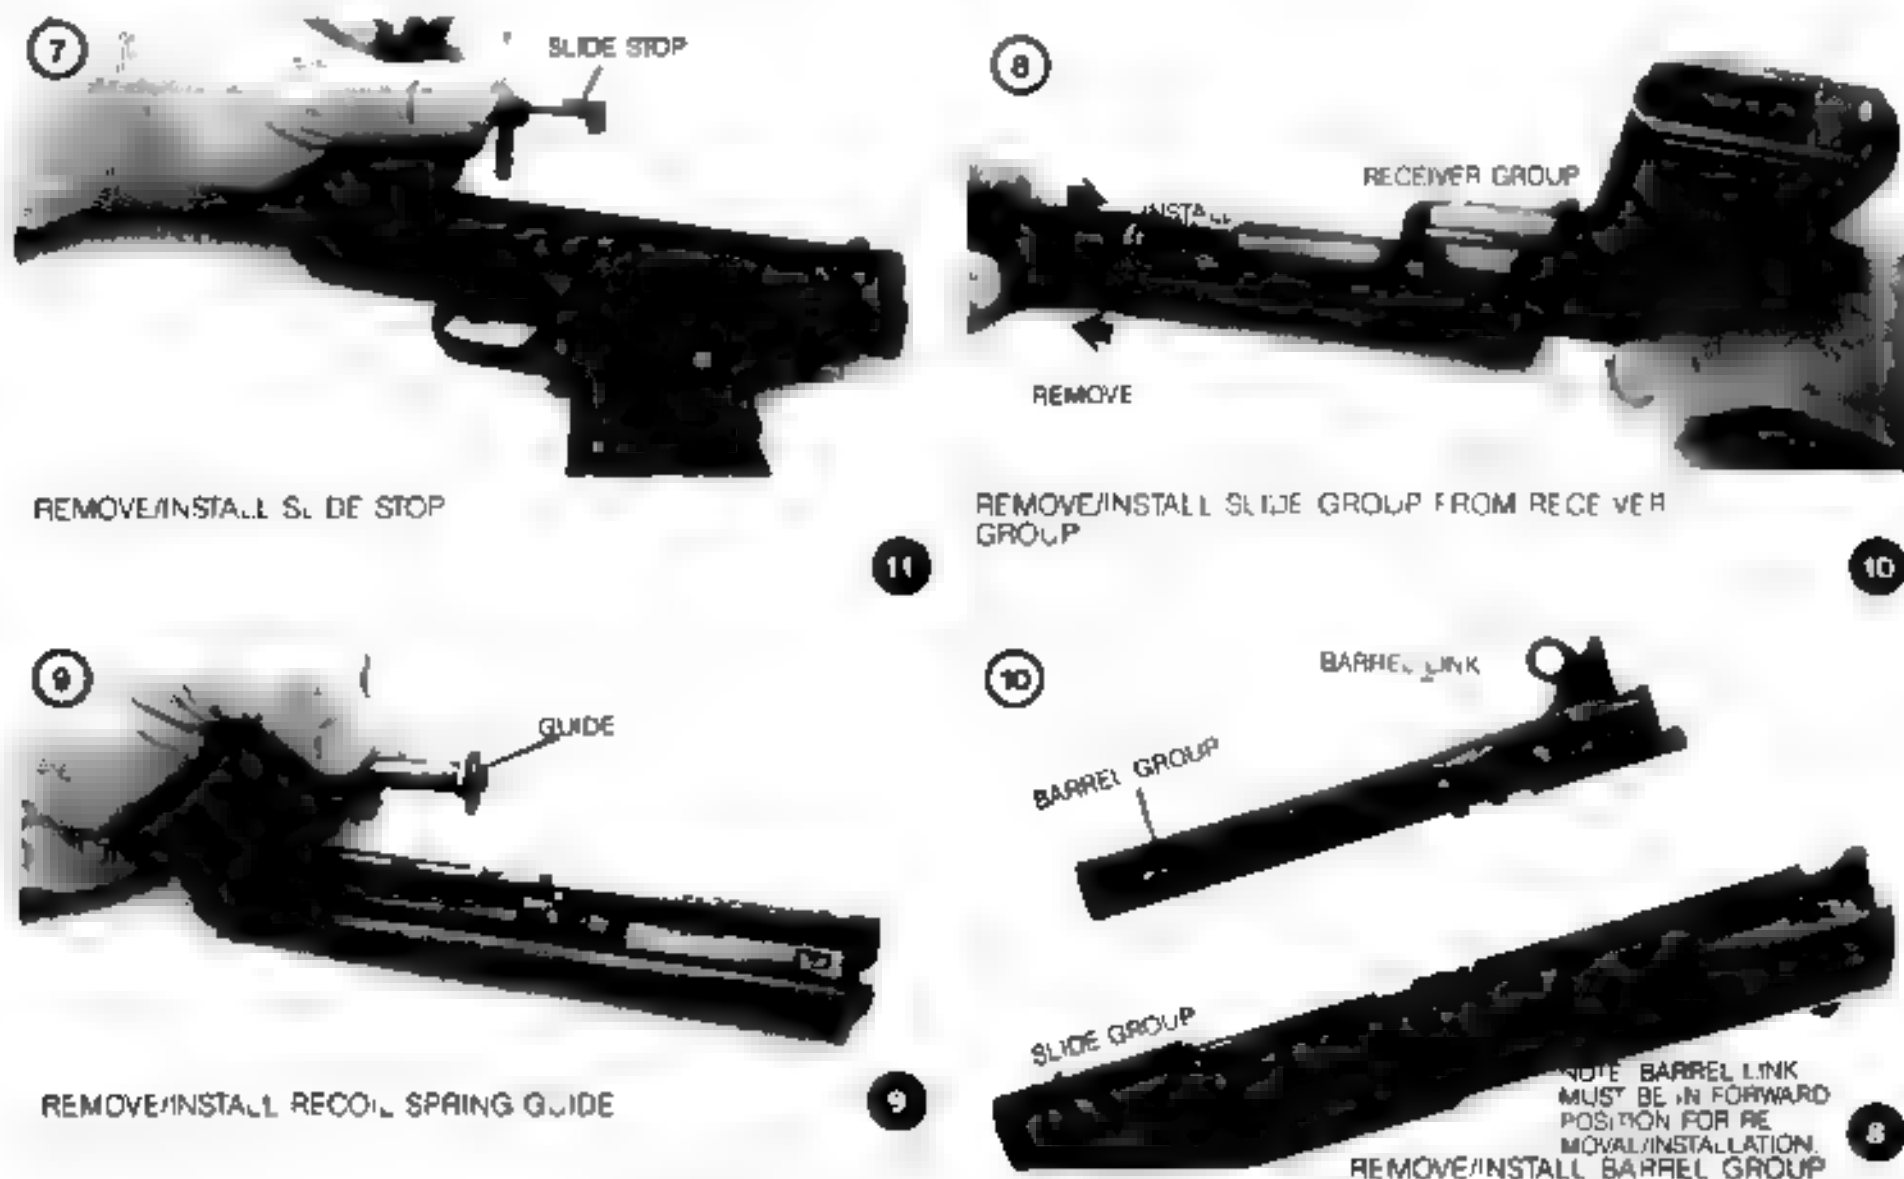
Disassembly/assembly of barrel and slide group. (3 of 4)
